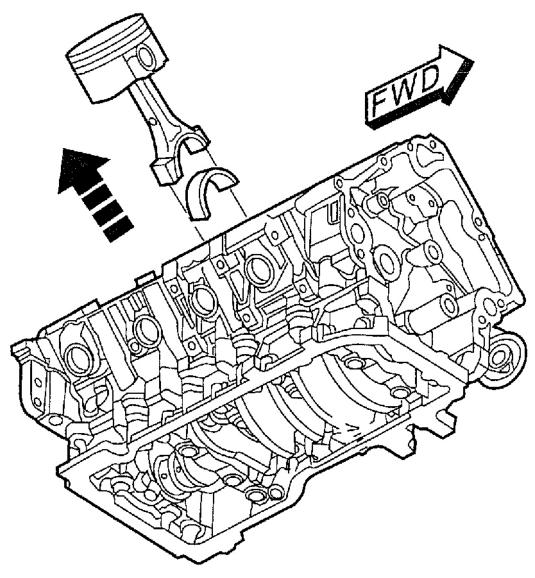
Removing Connecting Rod Bolts & Caps Courtesy of DAIMLERCHRYSLER CORP.
